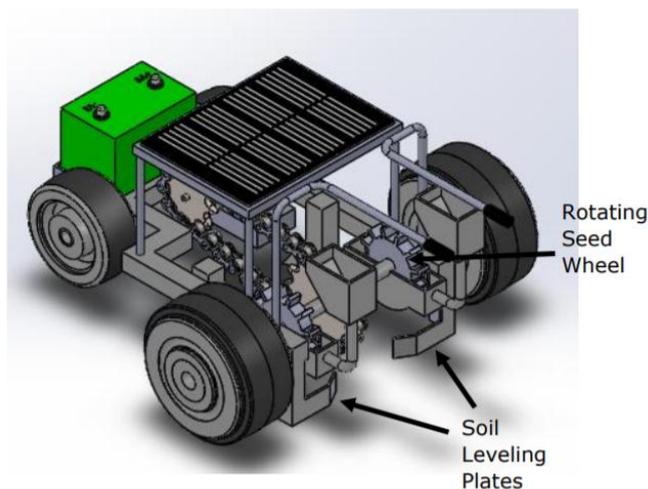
SEED SOWING MACHINE MODEL VIEW 3
